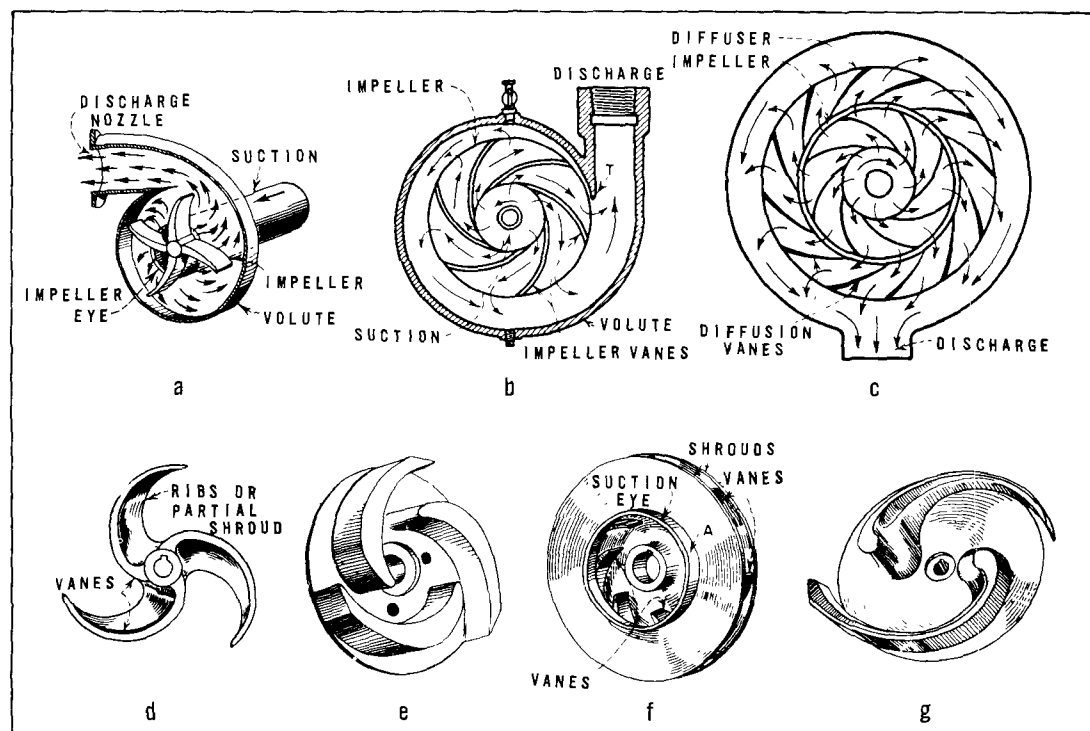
Centrifugal pumps: (a) Principle of centrifugal-type pump, (b) radial section through volute-type pump, (c) radial section through diffuser-type pump, (d) open impeller, (e) semi-enclosed impeller, (f) closed impeller, (g) nonclog impeller (Dolman, 1952).
